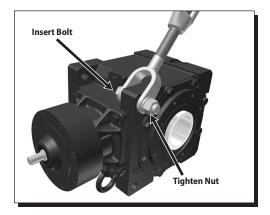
Turnbuckle Rod Type Torque Arm Parts
